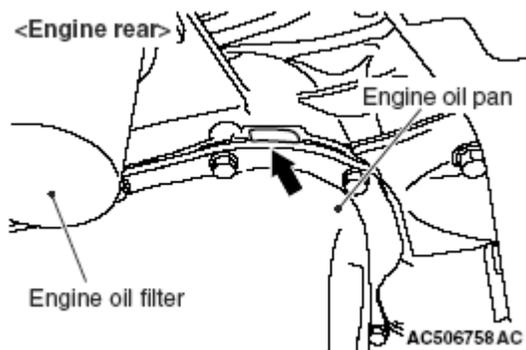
Identifying Engine Oil Filter And Engine Oil Pan
